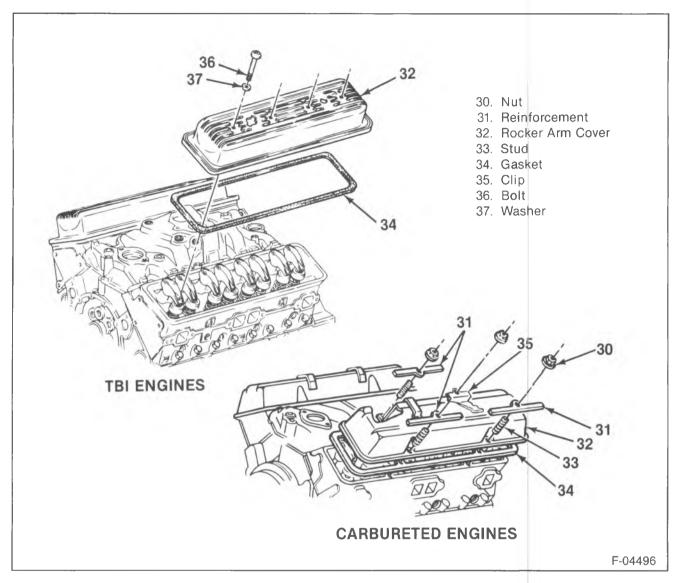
Rocker Arm Cover (5.0L and 5.7L Engines)
